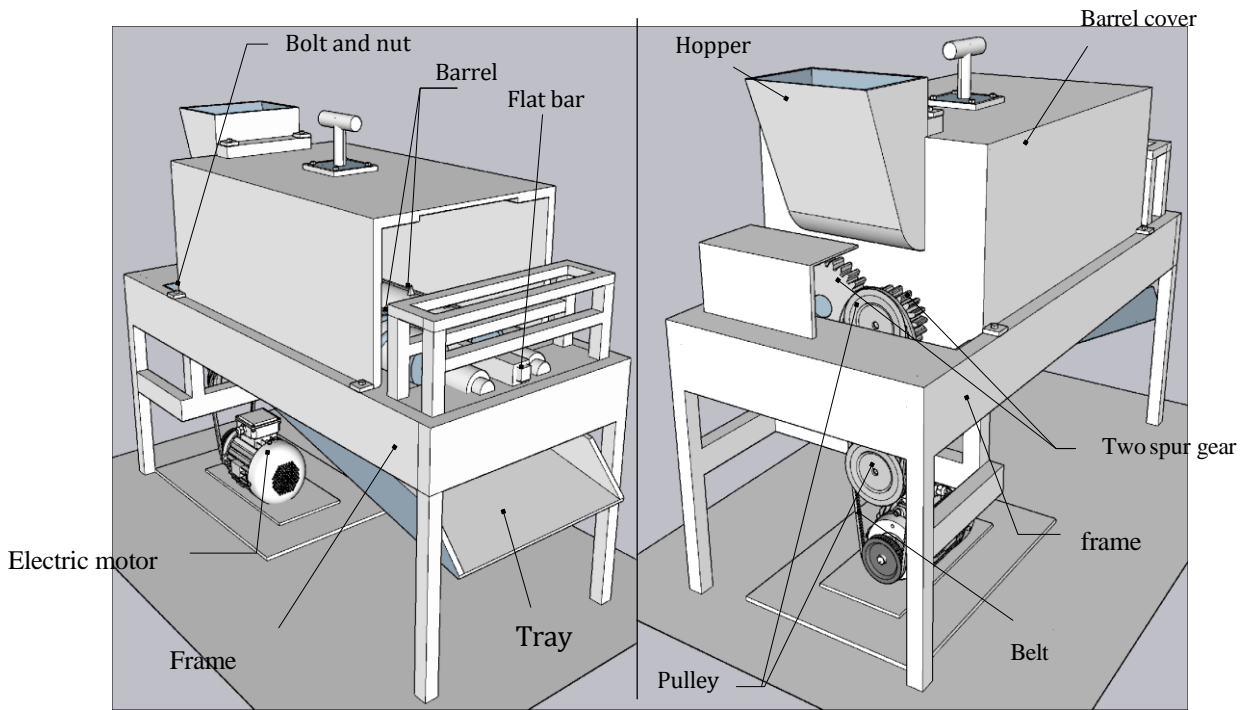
Drawing of side top and front view of coconut de-husking machine
